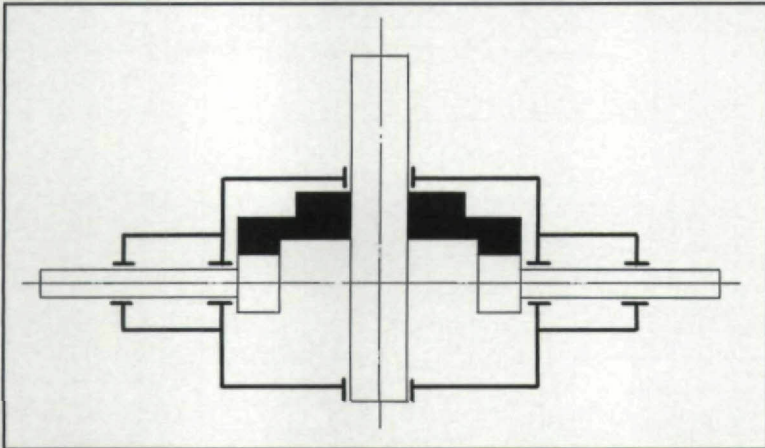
Multi-power design for a pinion as an integrated part of a shaft.
